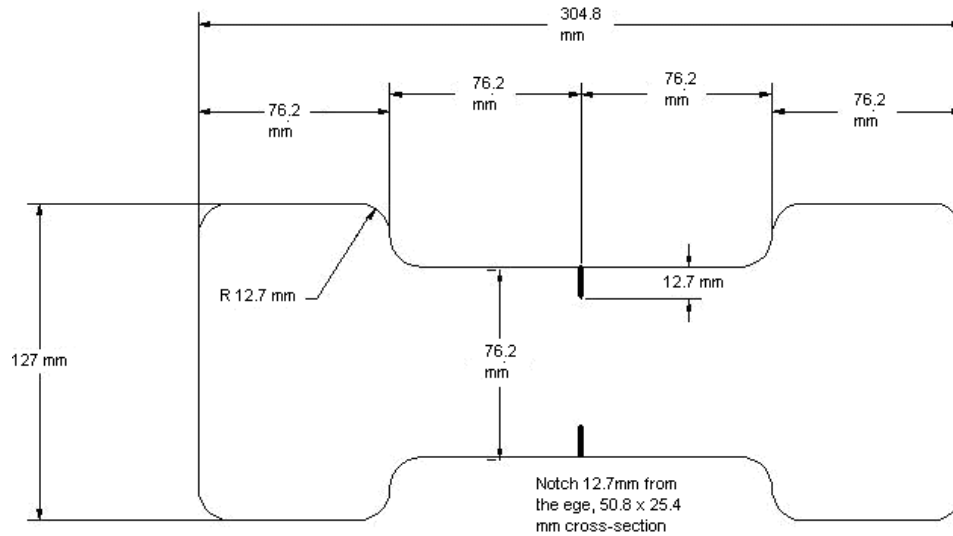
Dimensions of notched tensile prim for crack-opening displacement test (mm)
